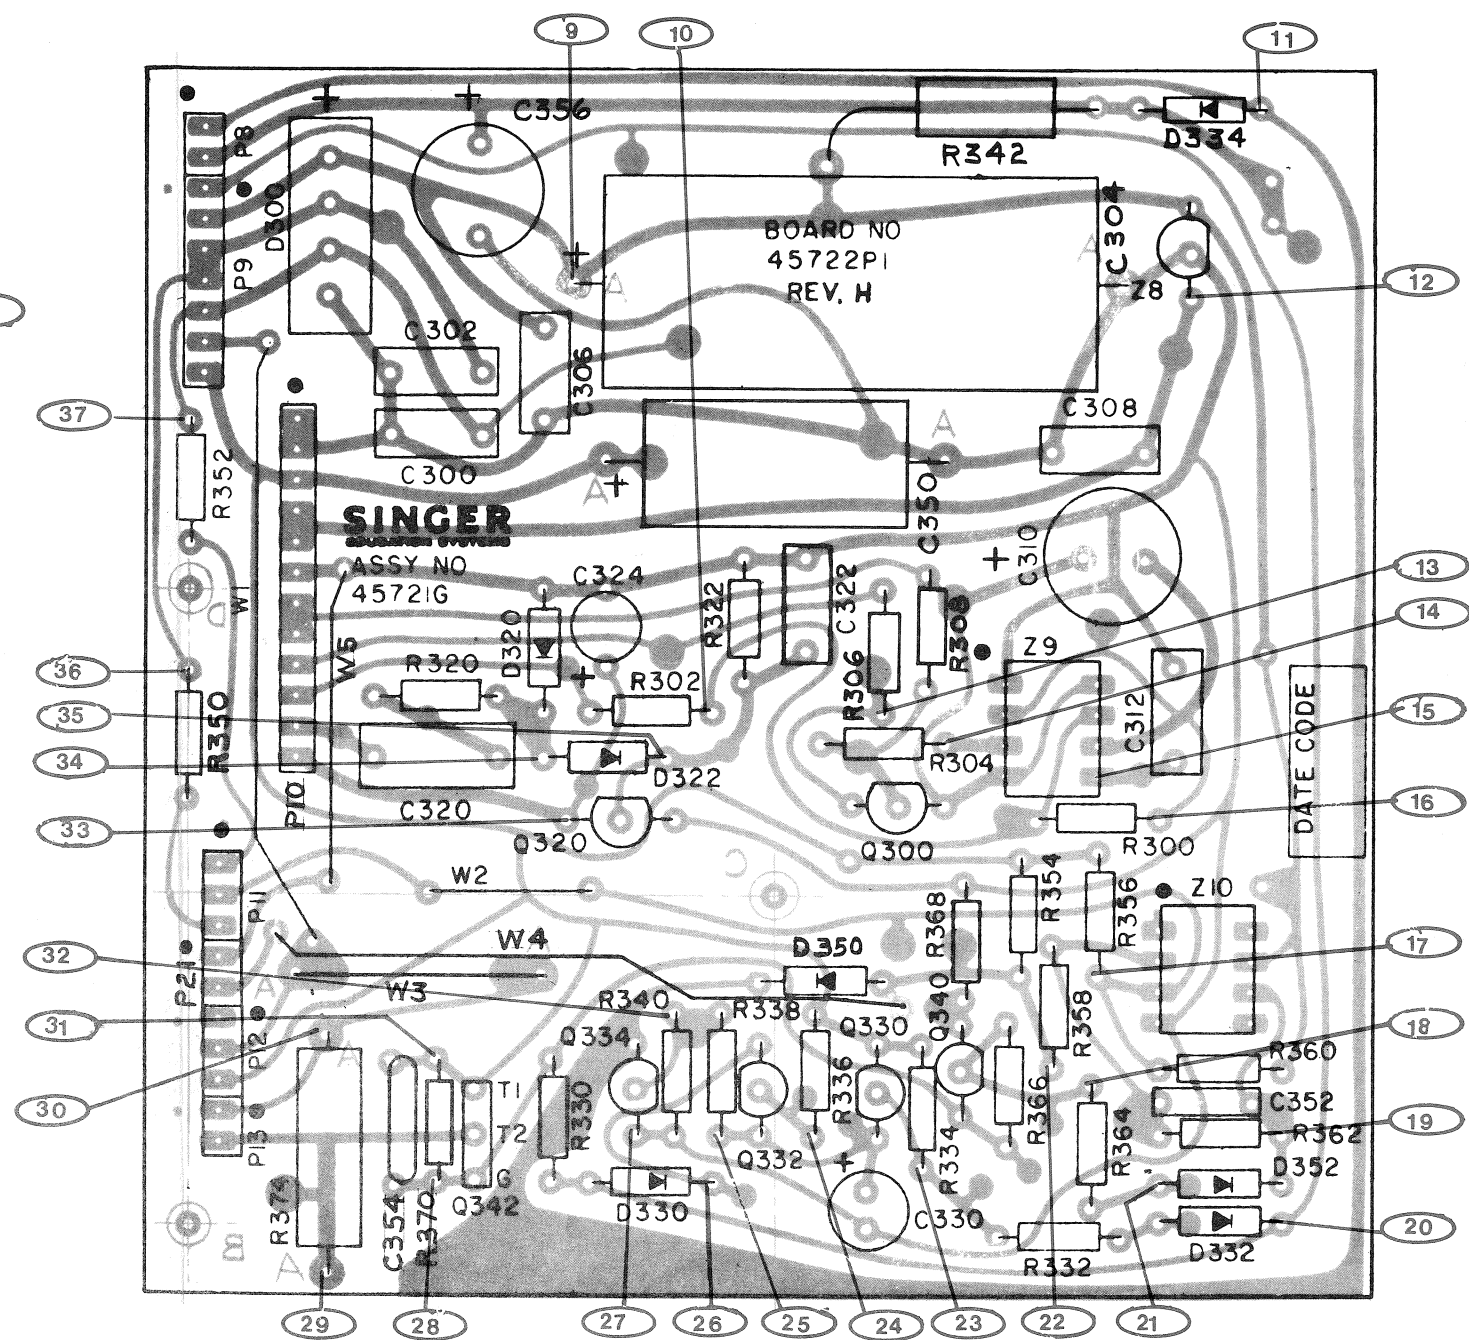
POWER SUPPLY AND AF-T BOARD ASSEMBLY (Model 3230)
